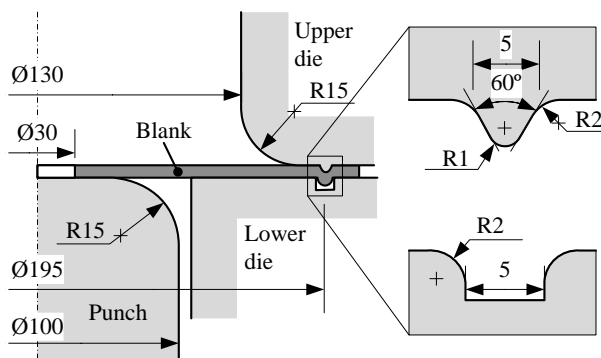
Schematic illustration of the tools geometry and specimen used in the hole expansion test. All dimensions are in millimeters.
